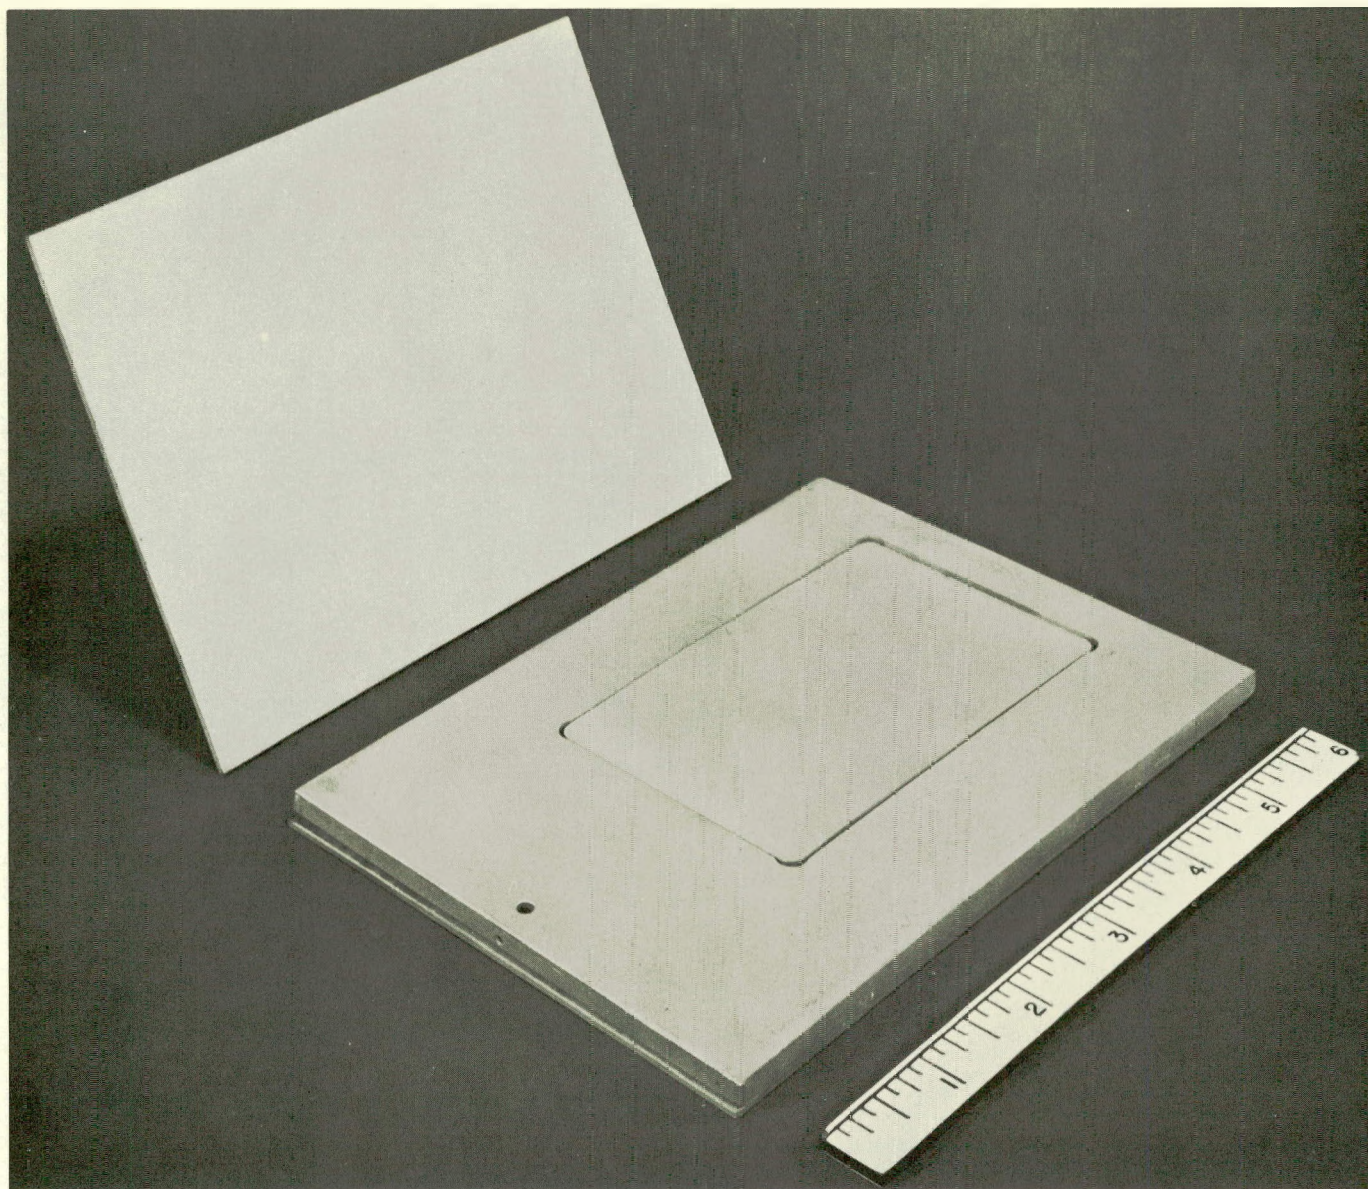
Fuel Plate Sandwich Assembly Before Welding
